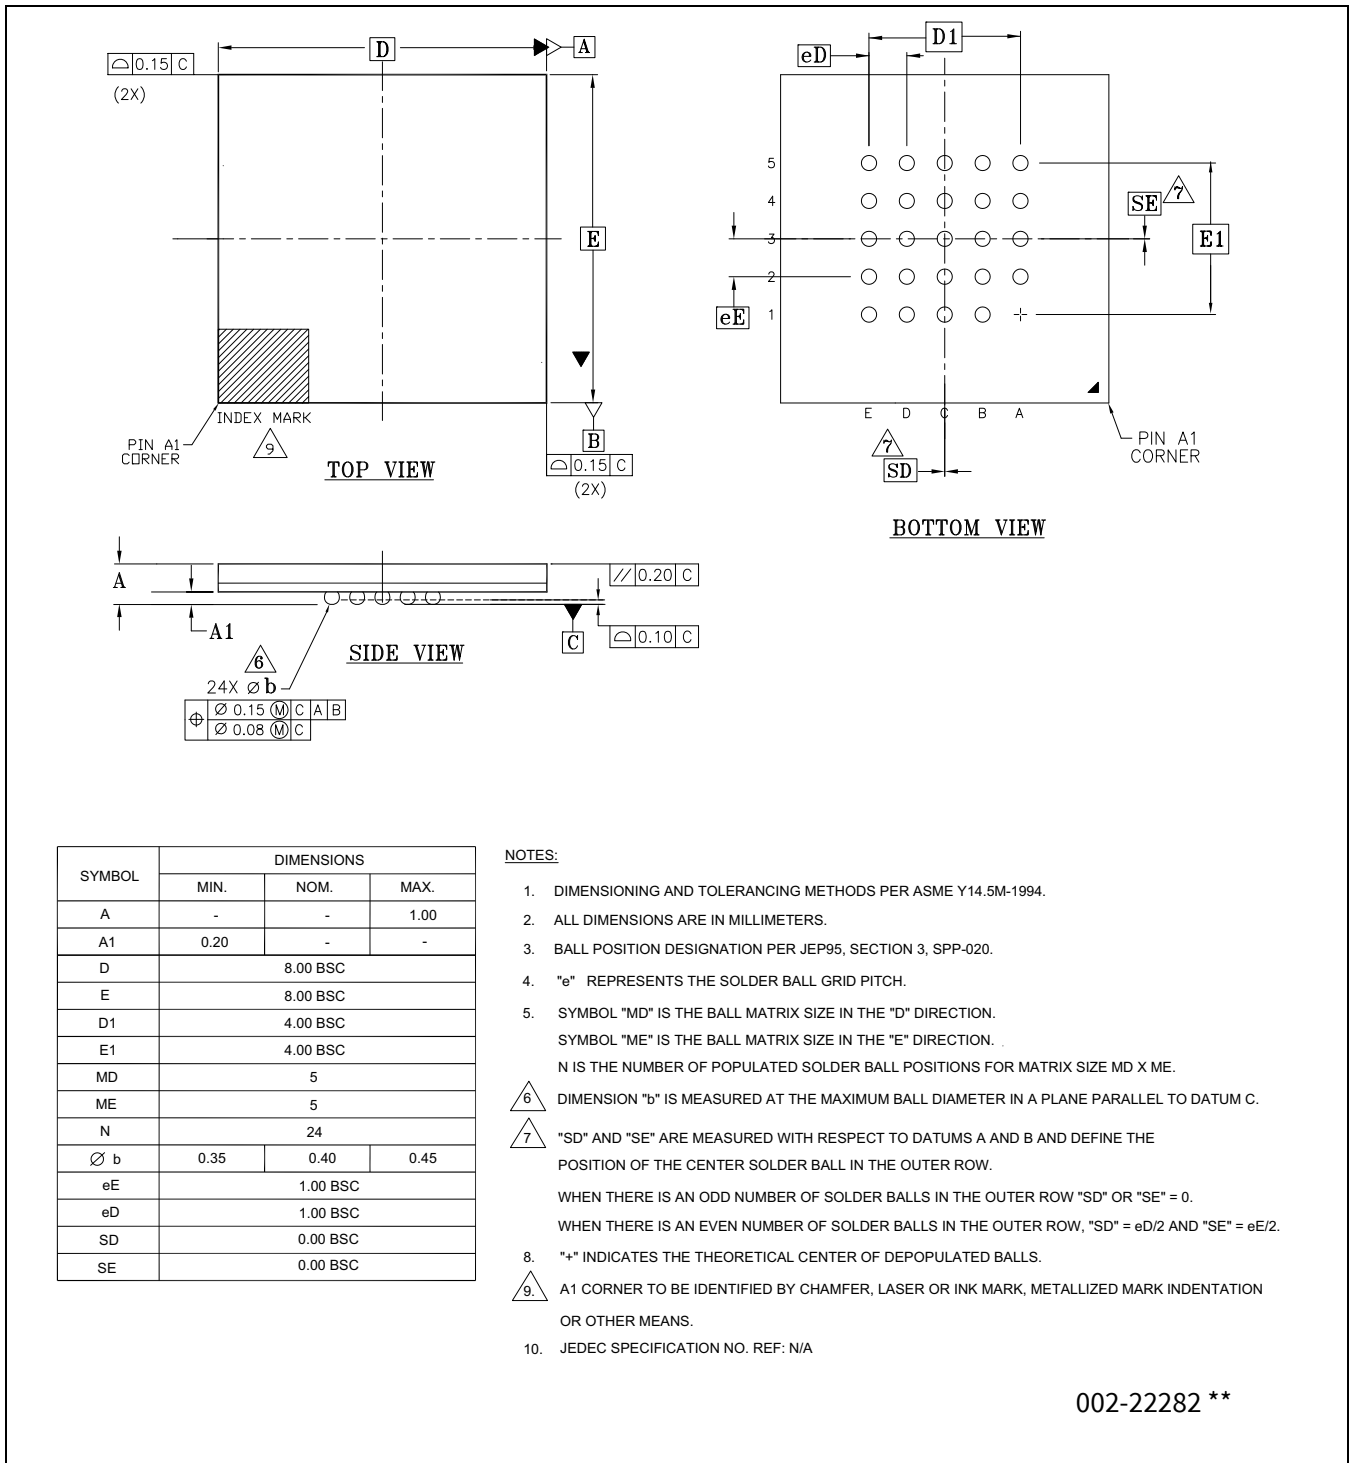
24-ball BGA (8.0 × 8.0 × 1.0 mm) package outline (PG-BGA-24), 002-22282
